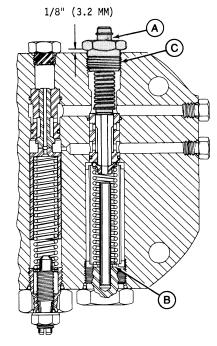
JDH-19A Adjusting Screw in Stroke Control Valve Housing
